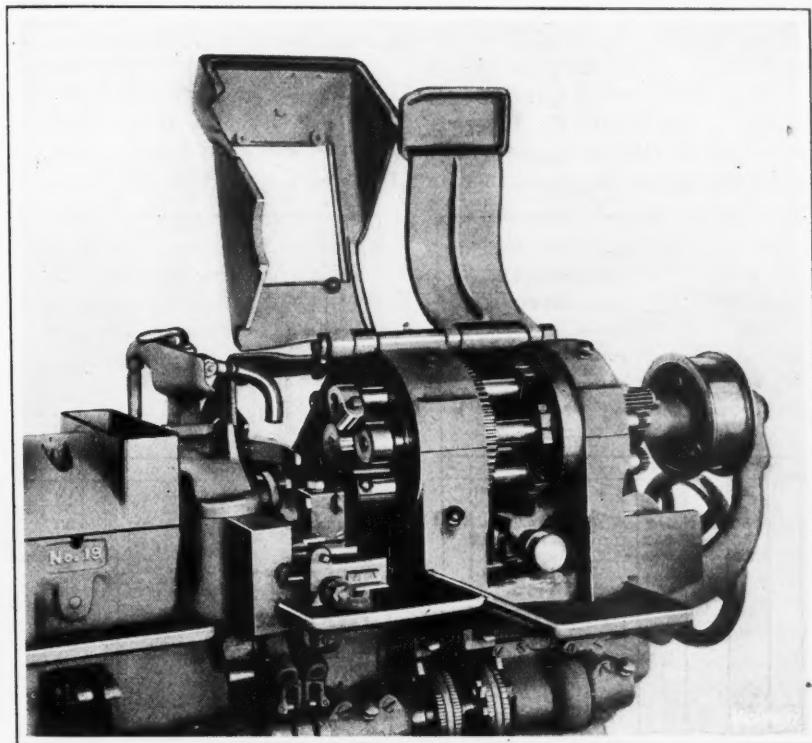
Turret Mechanism of High-speed Machine equipped with Sliding Tool-spindles
